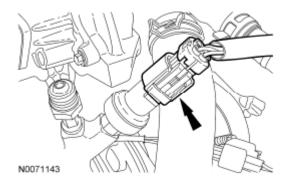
Locating Power Steering Pressure Switch Electrical Connector
